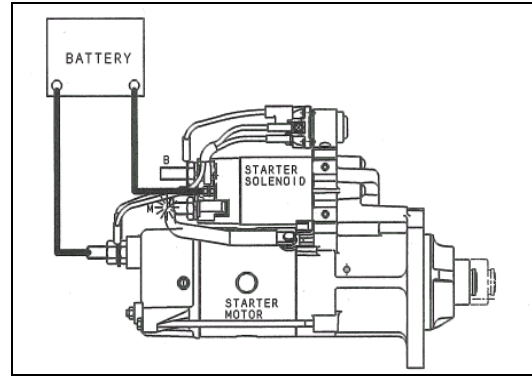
TESTING HOLD-IN WINDINGS (GROUND-FLOAT TYPE)
